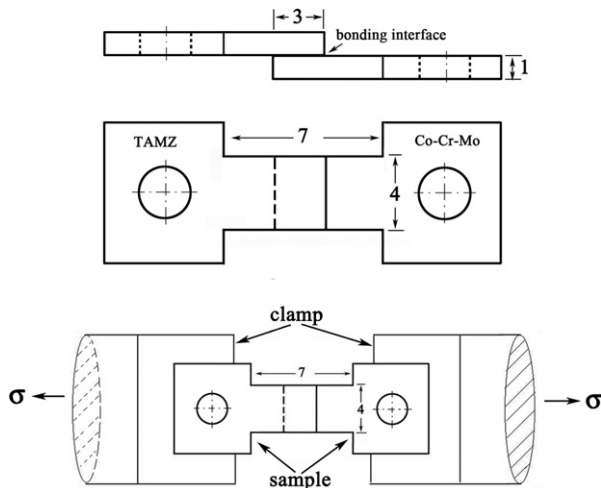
Sample dimensions and the schematic illustration of the tensile shear test.
